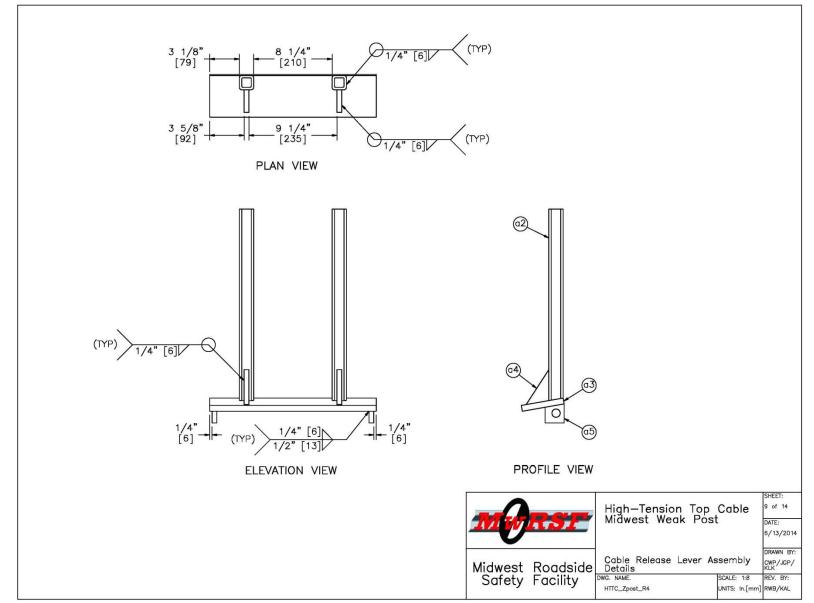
Cable Release Lever Assembly Details, Test No. HTTC-2
